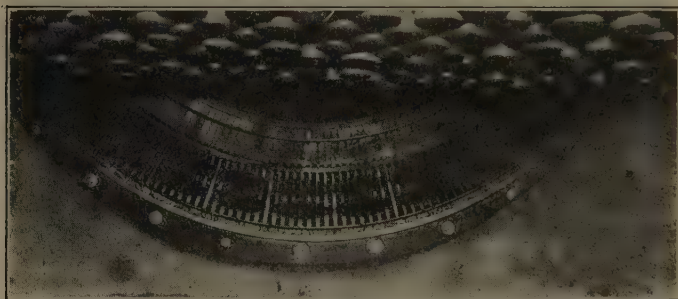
VIEW OF TURBINE WHEEL AND CONDENSER-BOILER TUBES
